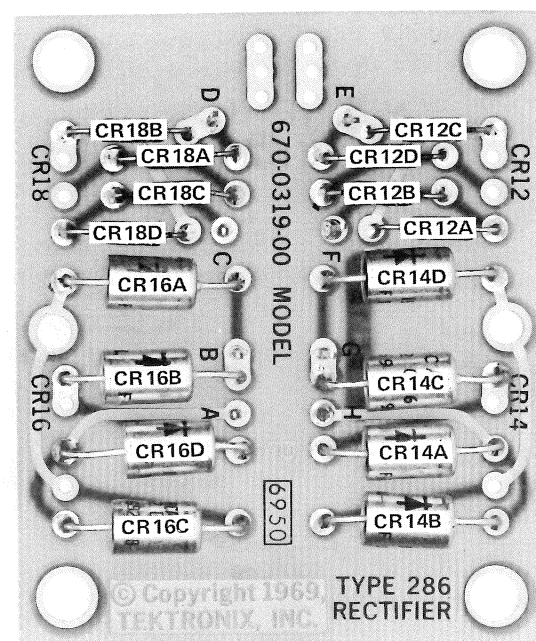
Component locations on the Type 286 Rectifier board.
